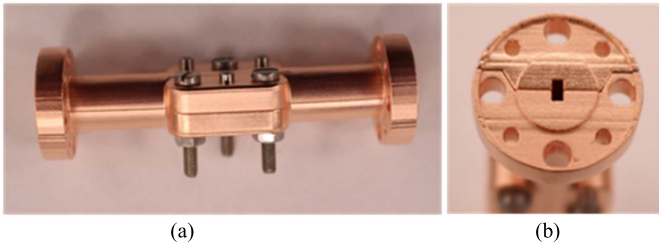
3-D printed and copper-plated WR-10 thru line after assembly of the split block. (a) and (b) Side-view and end-view showing the self-aligned flange.
